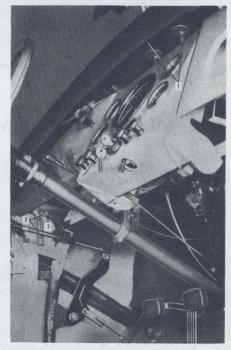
B-Windshield Assembly to Body Fastening Bolts.
